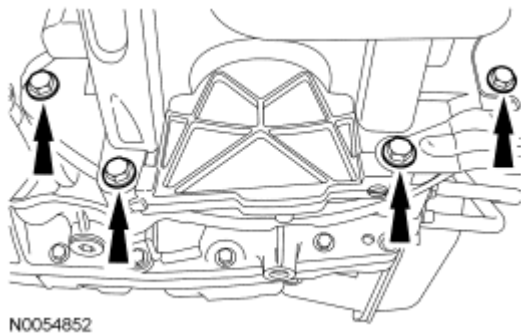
Locating Oil Pan-To-Transaxle Bolts
